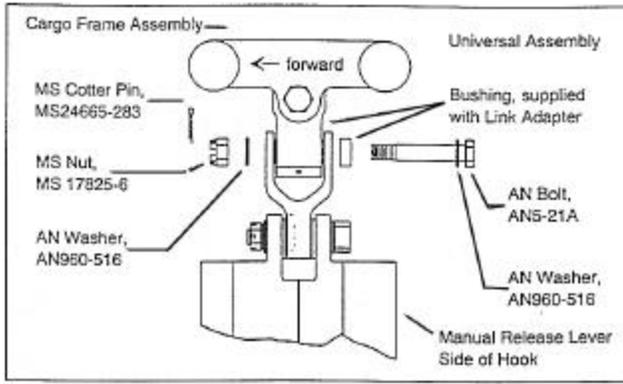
Cargo Hook Assembly to Cargo Frame Assemble Installation.
